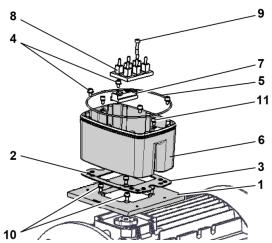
Assembly sequence: Connection box - adapter plate, size D
